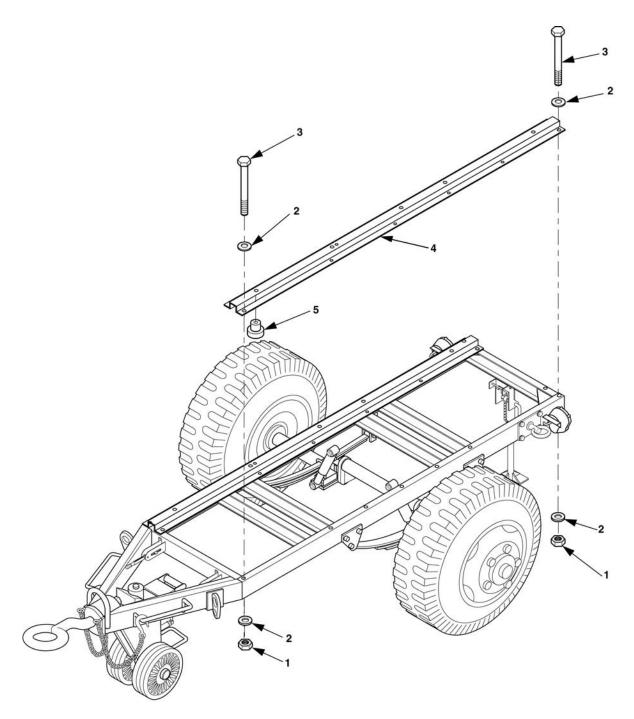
Replace AN/MJQ-36 Generator Mounting Rail.
